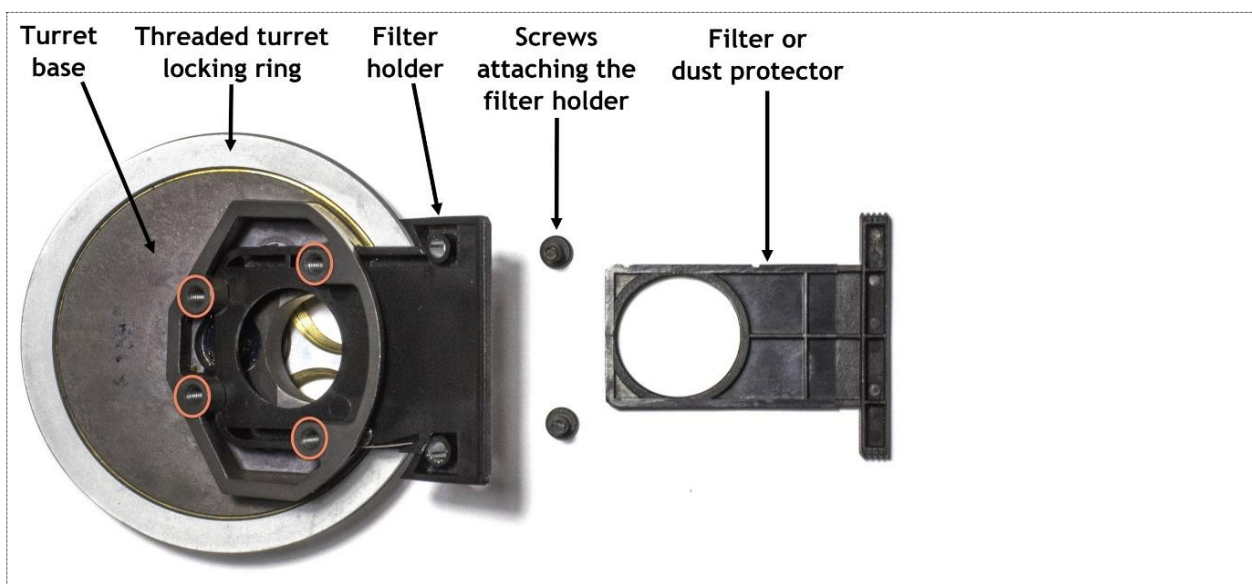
The nosepiece - view from the top after the nosepiece has been removed from the microscope arm. Also showing the filter dust protector and the filter holder.
